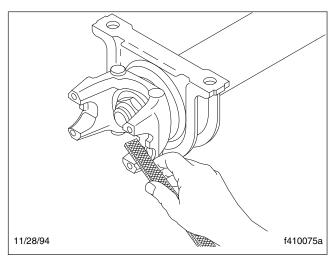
, Remove Burrs from a Half-Round End-Yoke Cross-Hole
